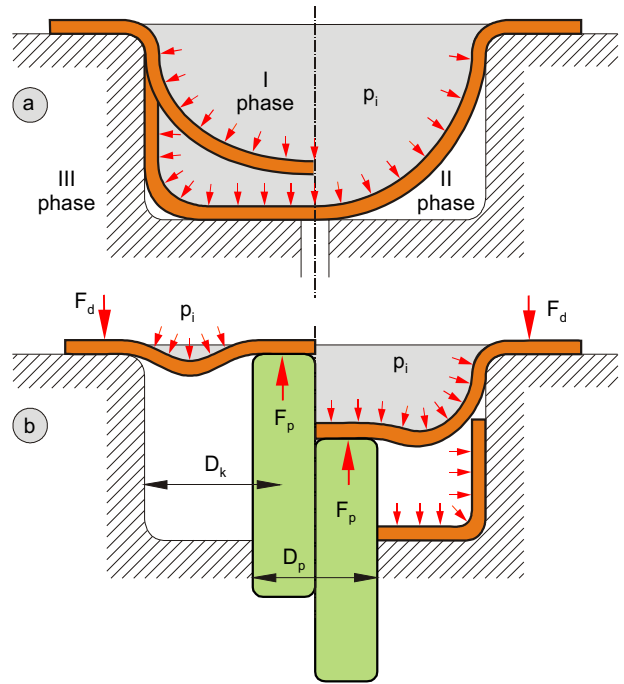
The drawing phase of sheet metal elements by means of fluid without blankholder (a) and with blankholder (b)
